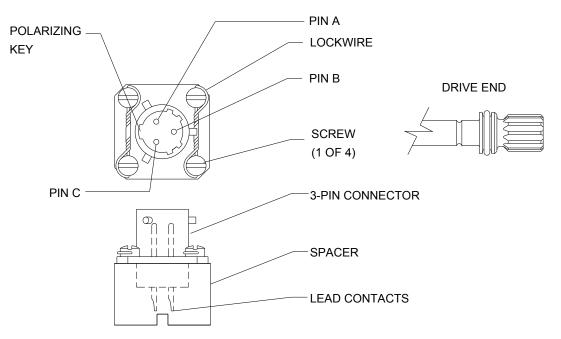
Removing 3-Pin Connector from Stator and Housing Assembly
